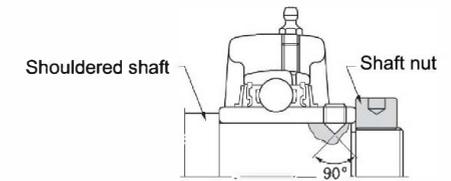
Example of installation with a shouldered shaft and shaft nut
